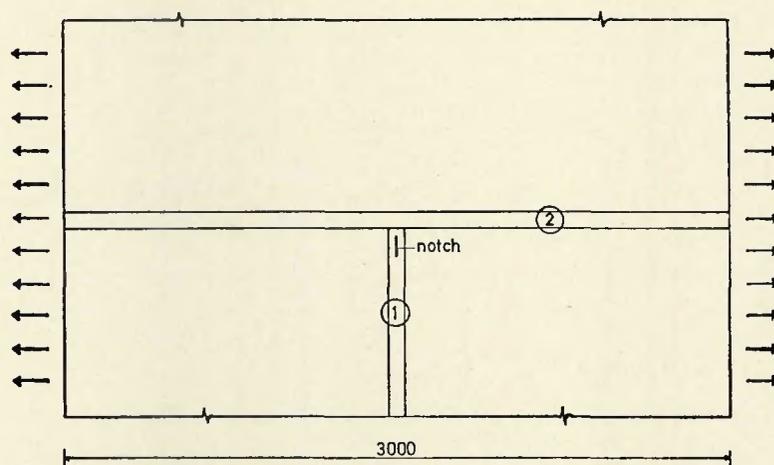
Wide-plate weldment. Test weld 1, notched after welding, becomes embrittled by hot straining provoked by deposition of weld 2
